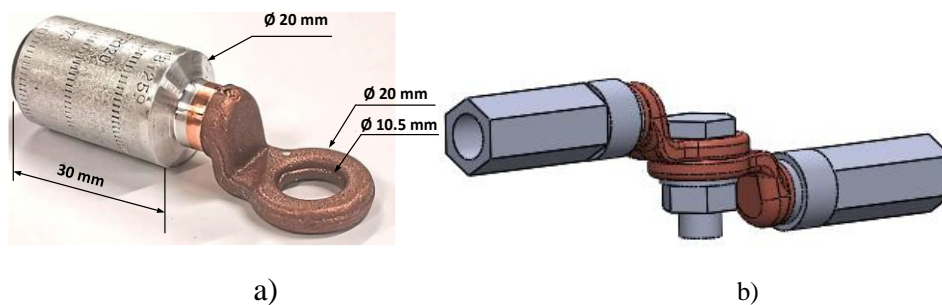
ICAU120 Al-Cu connectors. a) Before compression. b) CAD drawing after compression including the bolting elements.
